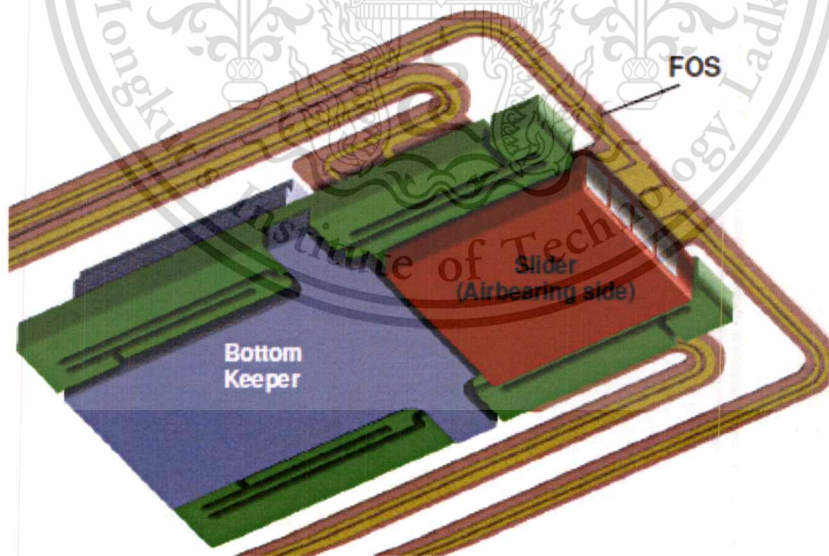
Bottom view of a MAGMA actuator CAD drawing
